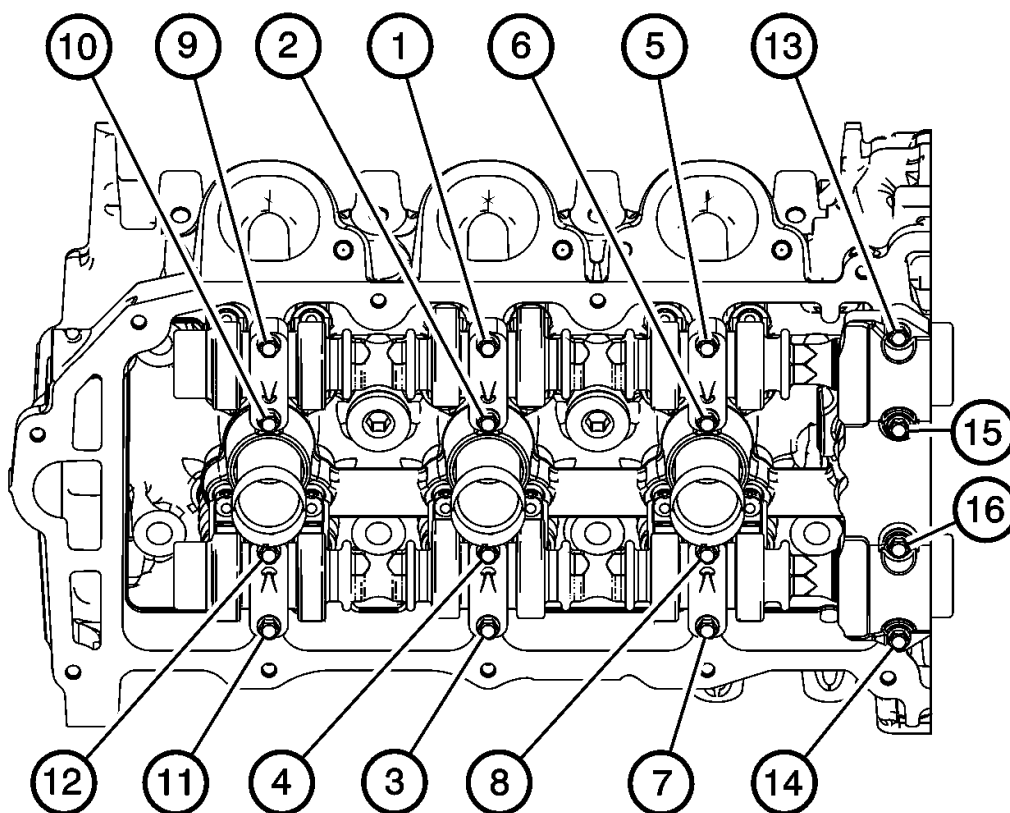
Camshaft Bearing Cap Bolts Tighten Sequence
